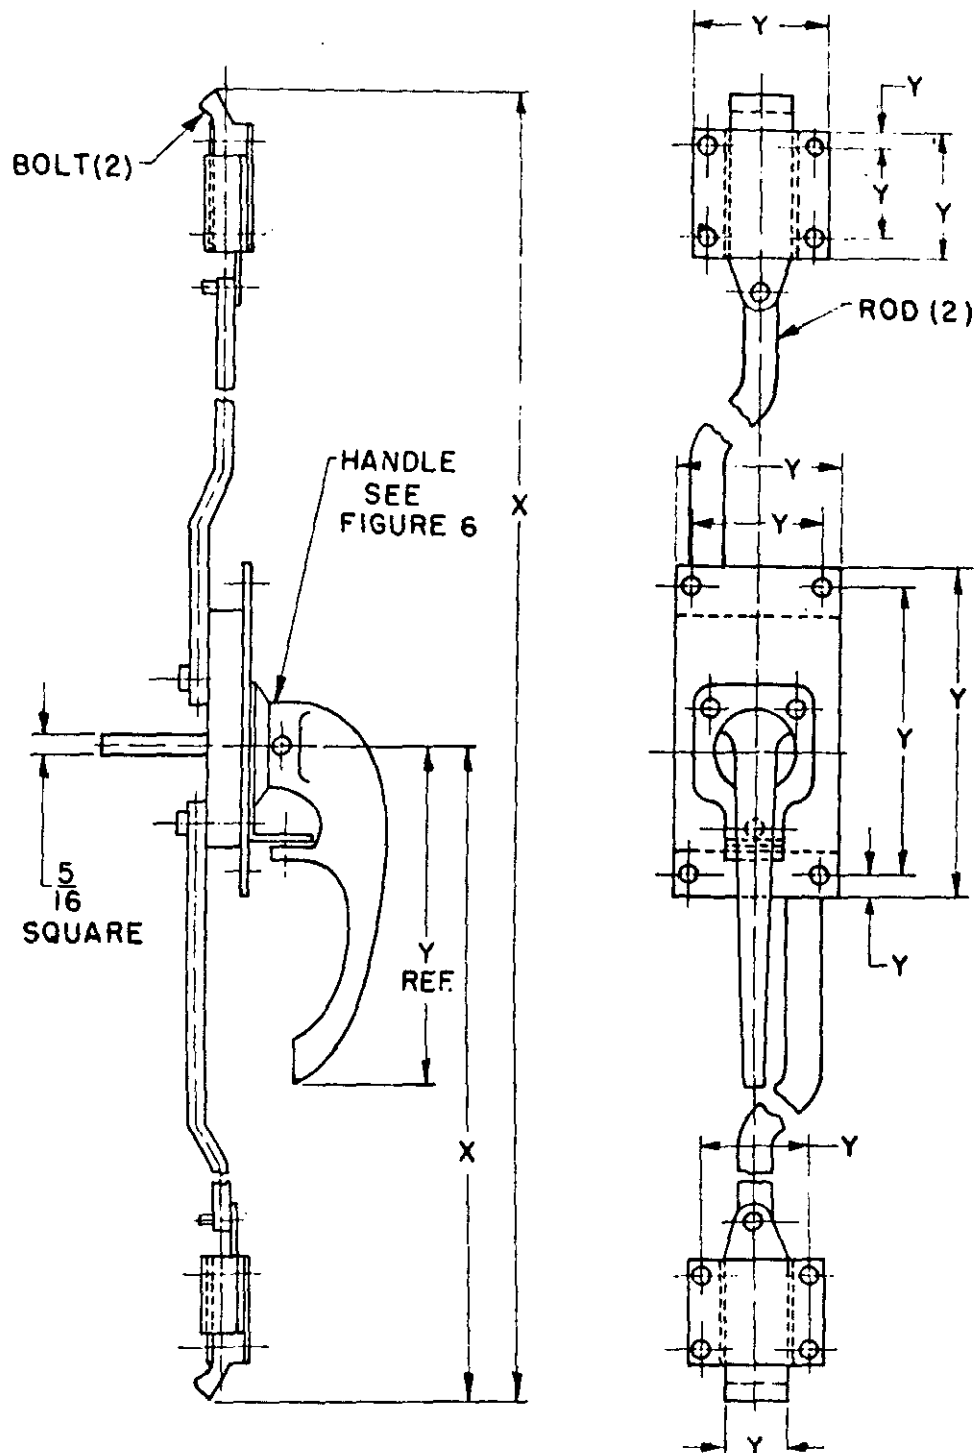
LOCK, DOOR, VAN — SLAM BOLT.
